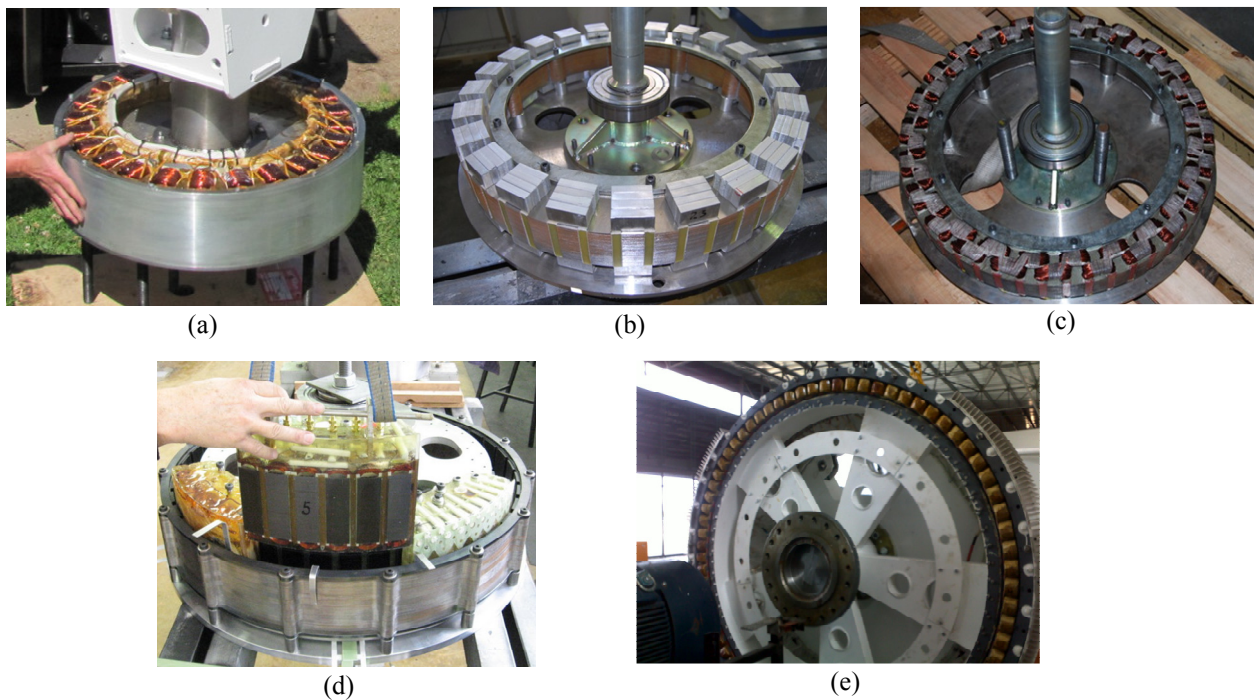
(a) Machine 1 [11], (b) Machine 2 [12], (c) Machine 3 [12], (d) Machine 4 [13] and (e) Machine 5 [14].
